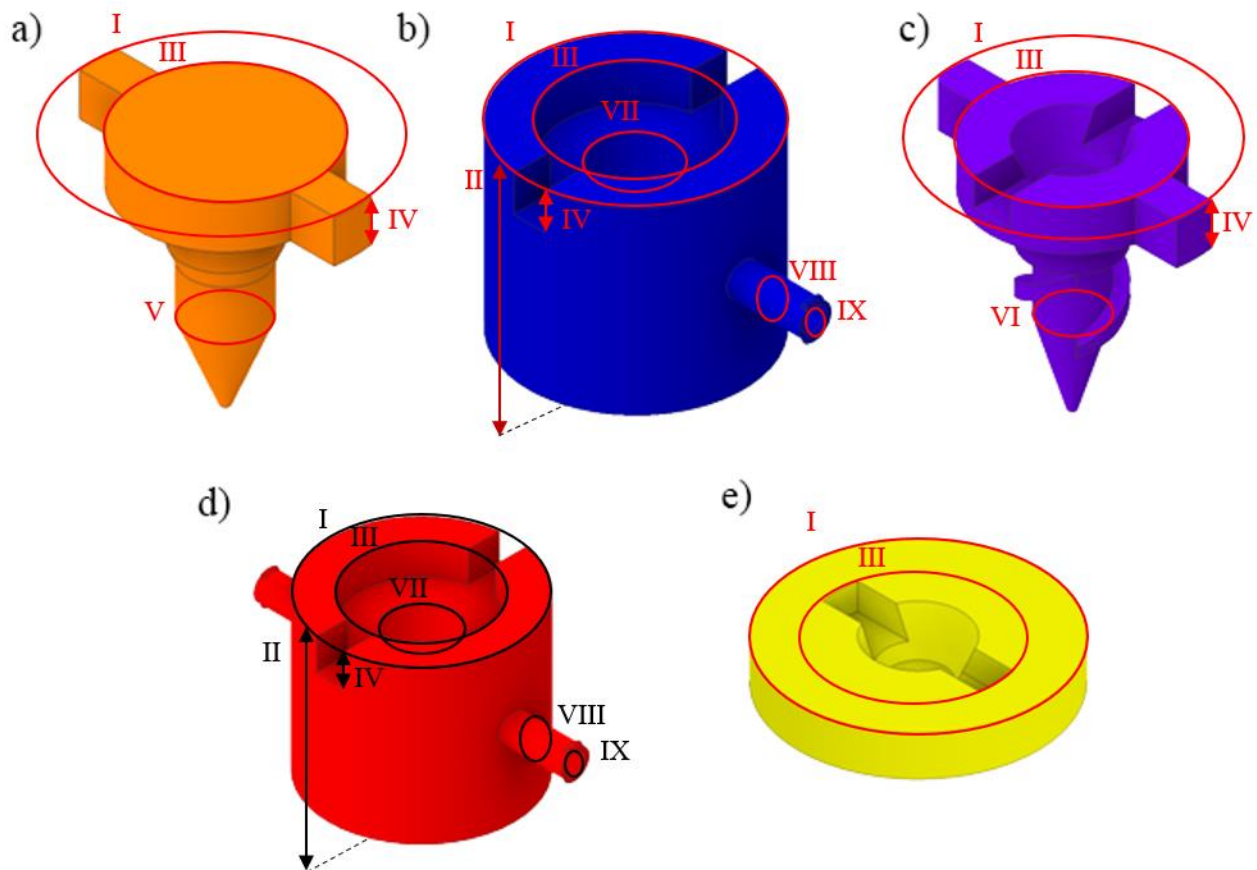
Embodiment of the Printhead Assembly a) Plug b) Head 1 c) Core d) Head 2 e) Adapter
